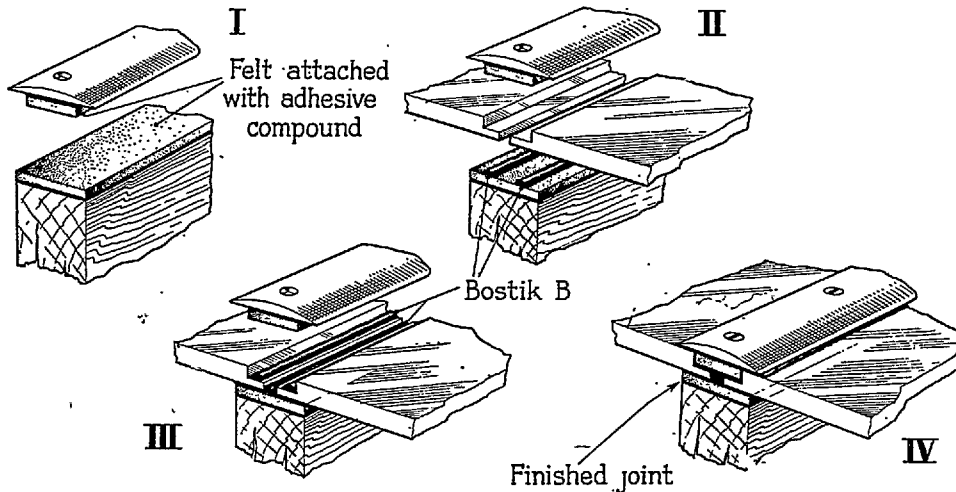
Attachment of felt strip to wooden frame and metal fairing strips
